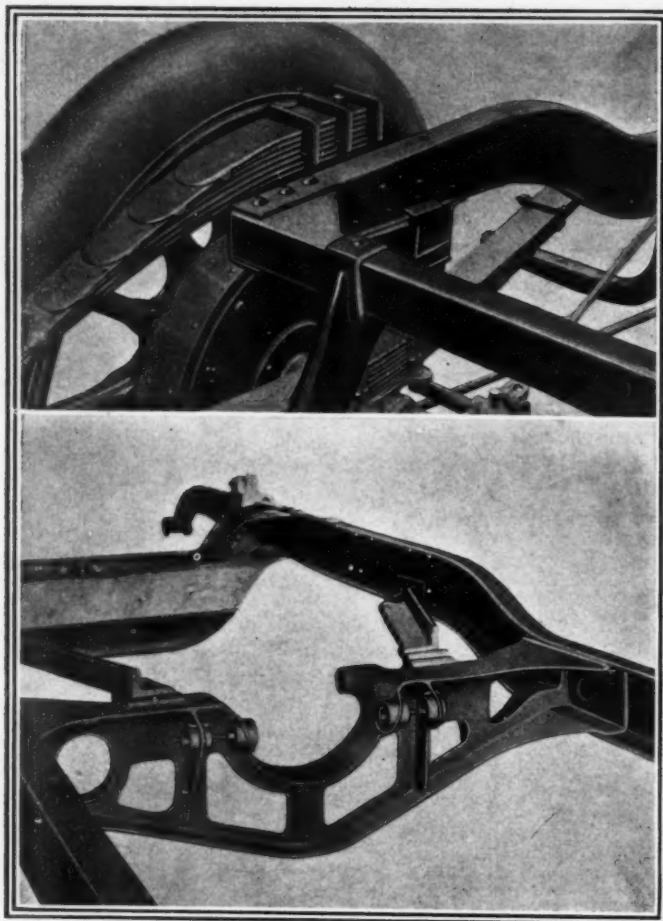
Showing the attachment of rear springs on all Overland chassis for 1912 models
